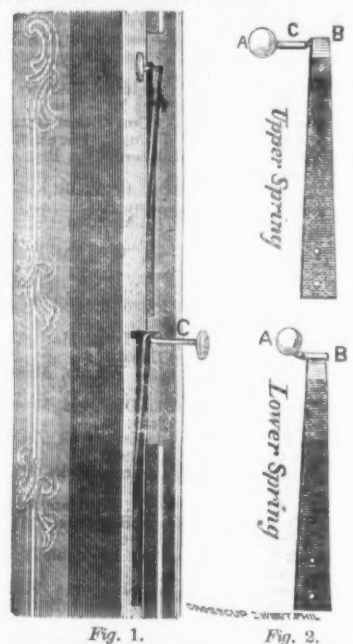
is a side view of the window frame and spring. Fig. 2 shows upper and lower springs. A is the thumb piece, B the shoulder and C the neck of the spring. The thumb piece of the spring, seen in Fig. 2, is a shell neatly plated and placed upon the neck, which extends nearly across it. The whole is filled with solder, which fills the thumb piece, while making it perfectly secure upon the neck. Fig. 3 shows the upper sash dropped down almost to the lower end of the upper spring. The parting bead is removed to show the position of this spring. A part of the front bead is also removed to show the position of the shoulder
